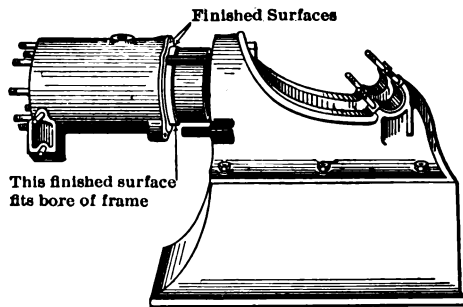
Flange Type, Cylinder Bolted into Frame.
